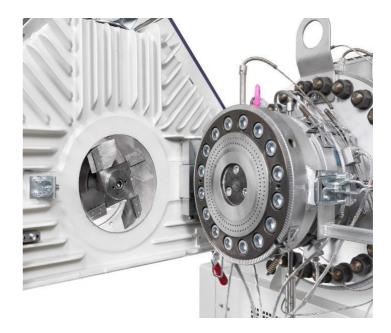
Close-up view of the pelletizing head with knife and perforated plate
